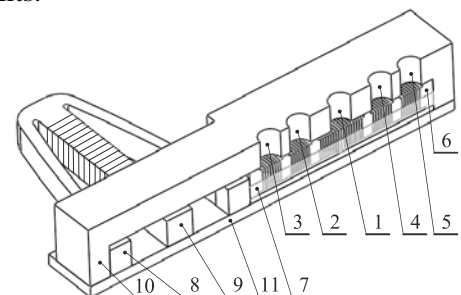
An axonometric view with a partial cross-section, a) lower plate actuator cylinder and a piezoelectric actuator.
